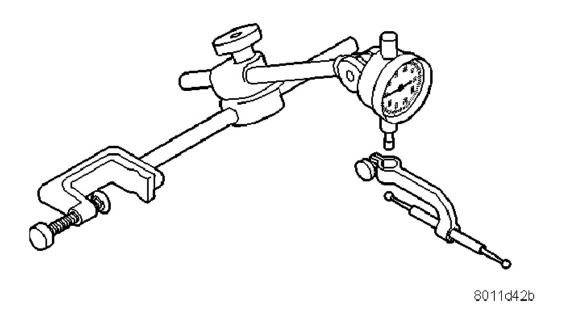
Dial Indicator C-3339 Courtesy of CHRYSLER LLC
